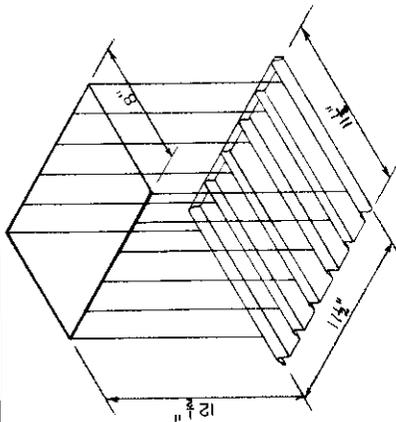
PULLING TABS FOR LARGE WELDED SPECIMENS.
